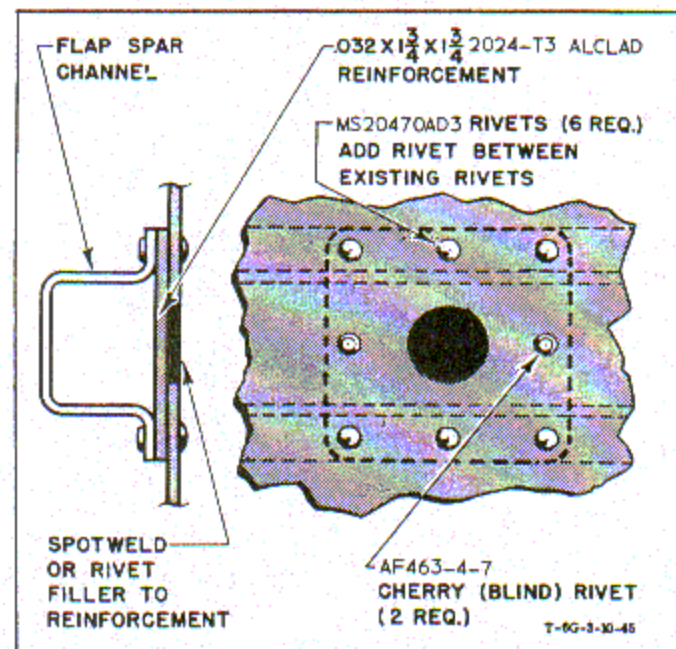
Repair of 1-Inch Diameter Hole in Skin Under Flap Channel Spar
